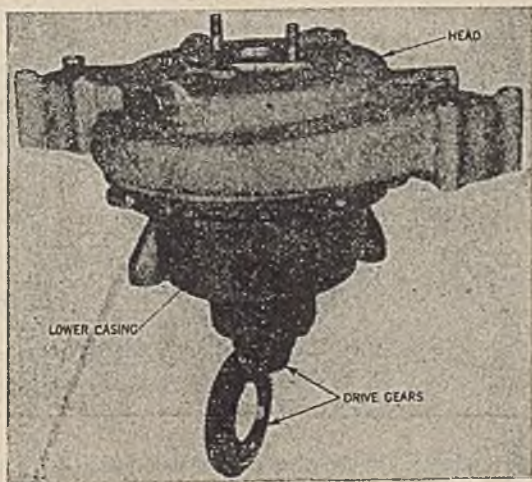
Graham super-charger showing rotor and drive mechanism, also method of lubrication.
